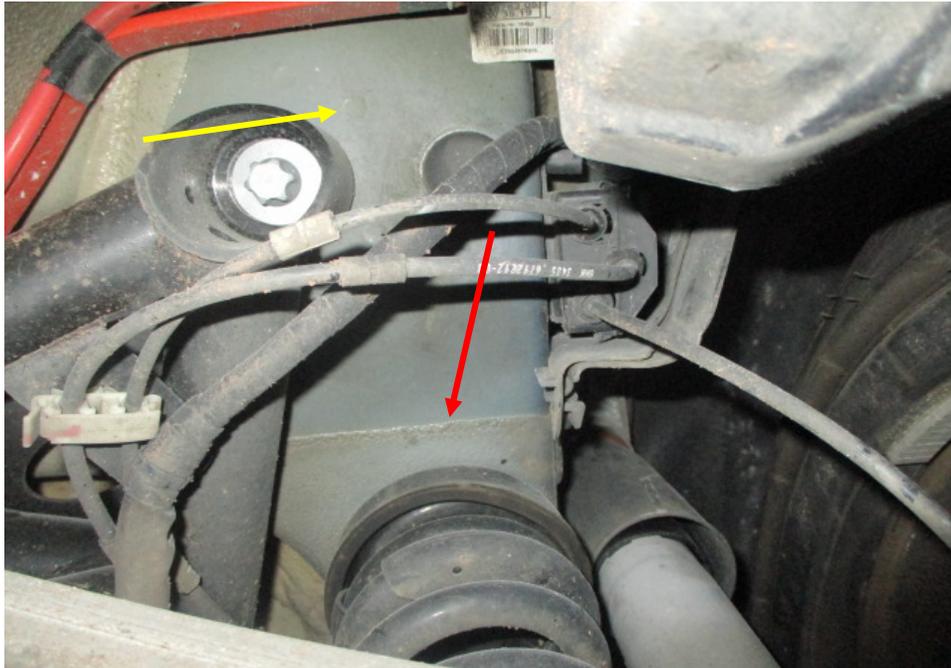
shows the chassis/structural body at the underside rear right of the Motor Car. I did not find any weld marks other than original spot weld marks (yellow arrow) on the chassis/structural body of the Motor Car. The original factory sealant (red arrow) at the joints along the chassis/structural body was untouched, indicating no work was done on the chassis/structural body of the Motor Car and that the chassis/structural body was originally fitted.
